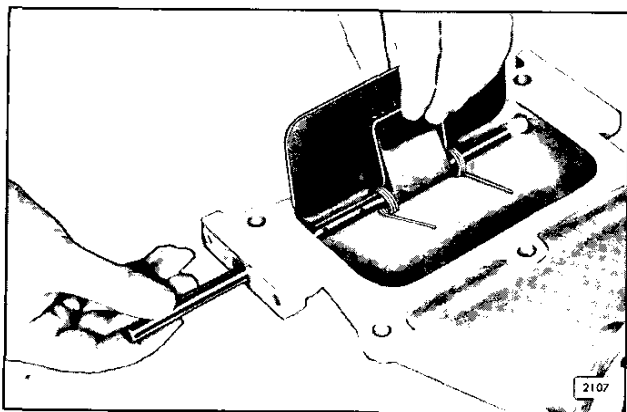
Installing Air Shut-Off Valve Spring and Valve
